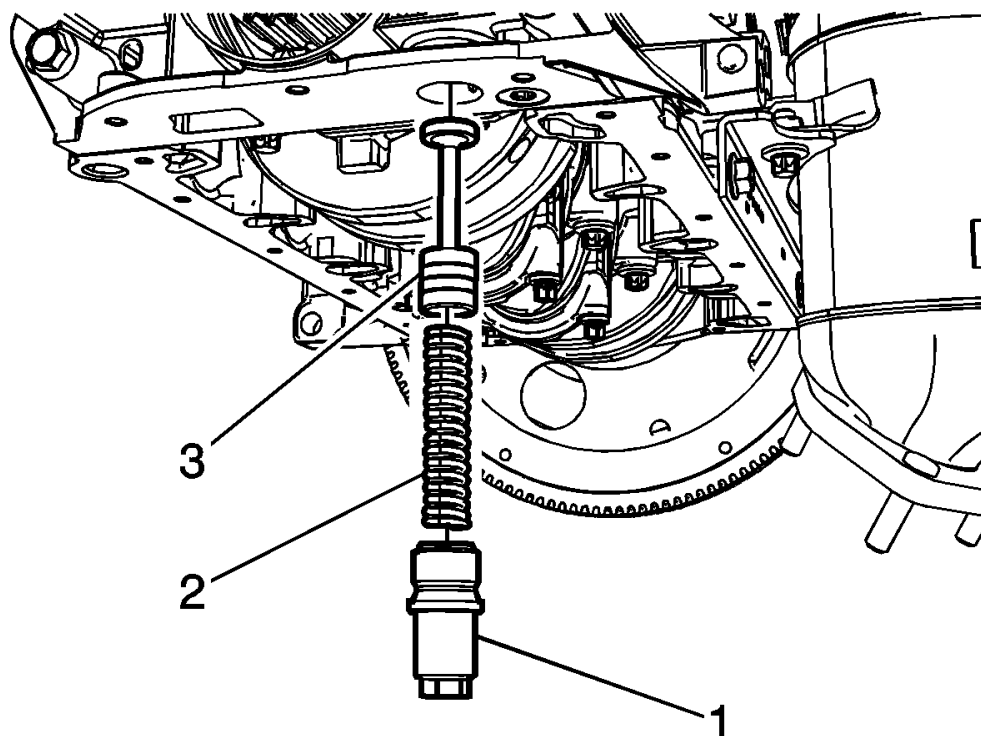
Oil Pressure Relief Valve Plug, Spring & Piston (Primary)
